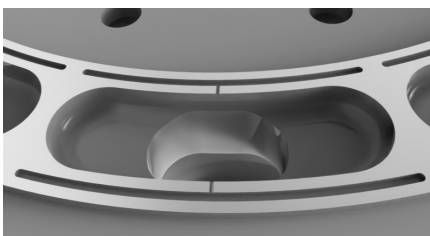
Detailed view of a single barrel port with pockets on both sides of the port
